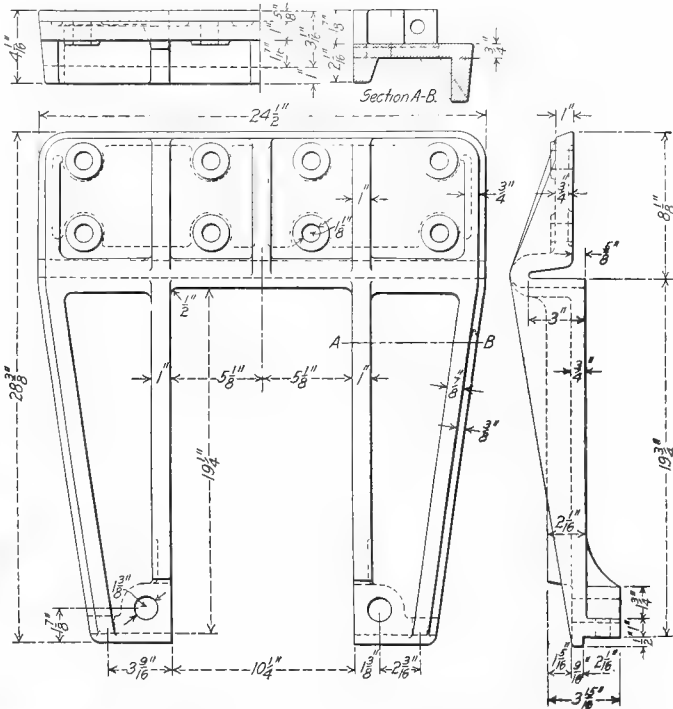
Pedestal of Six-Wheel Truck for Pittsburgh & Lake Erie 100-Ton Capacity Flat Car.
